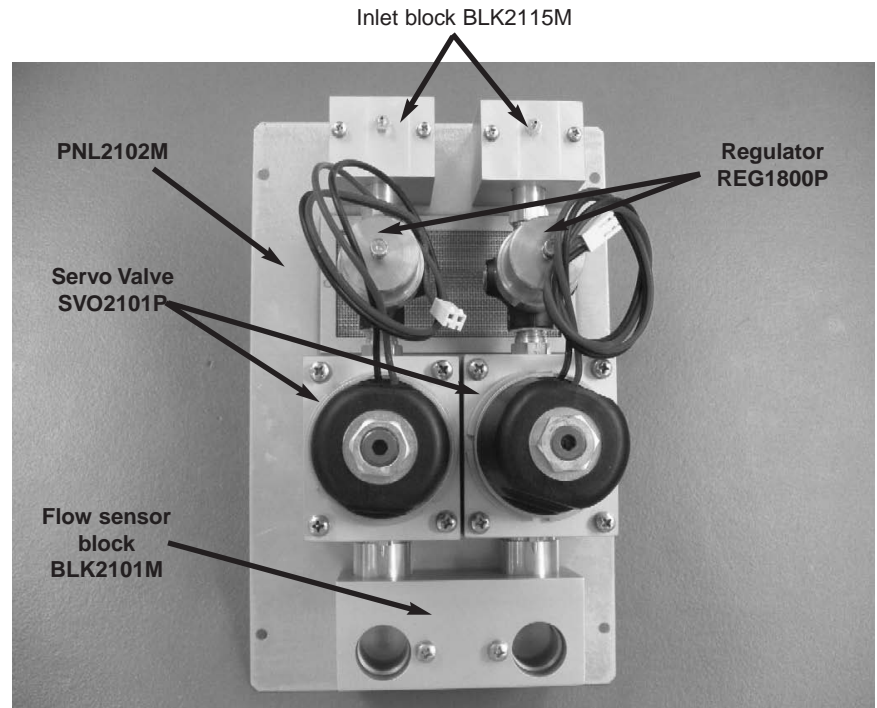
Pneumatics Panel Assembly SVO2101A
